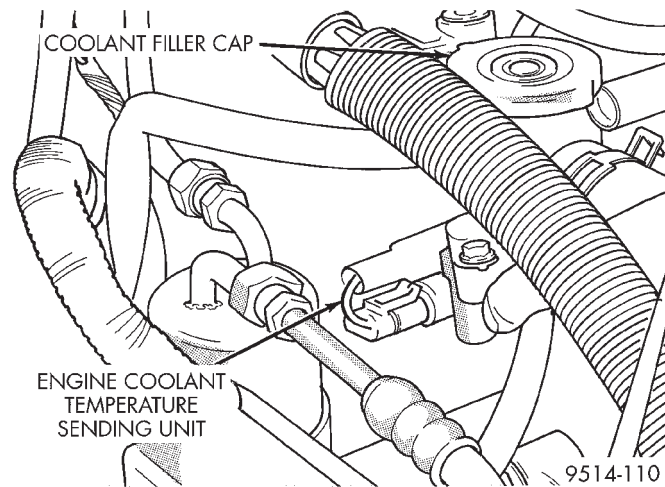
Engine Coolant Temperature Sensor—2.4L
